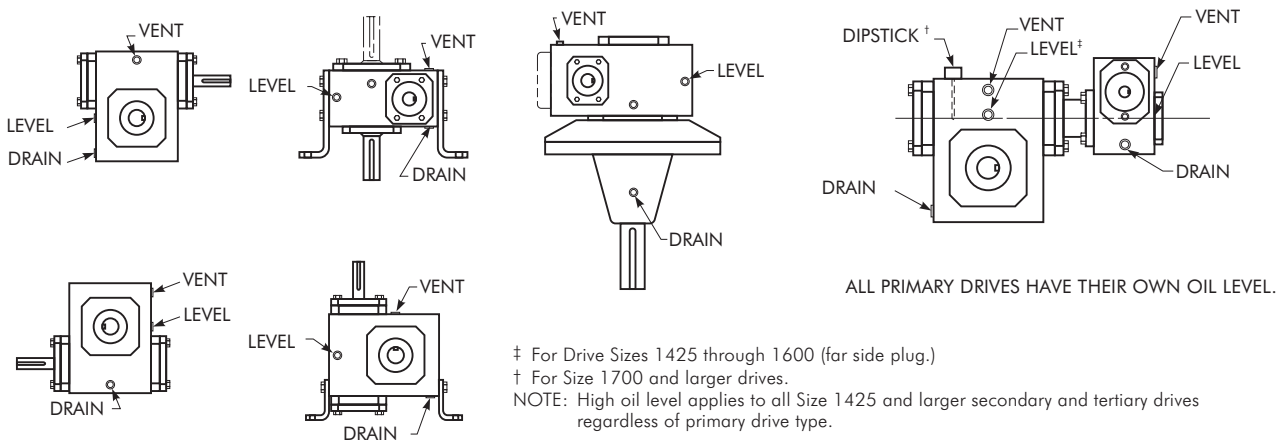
Worm drive mounting positions and vent plug, level, and drain locations
